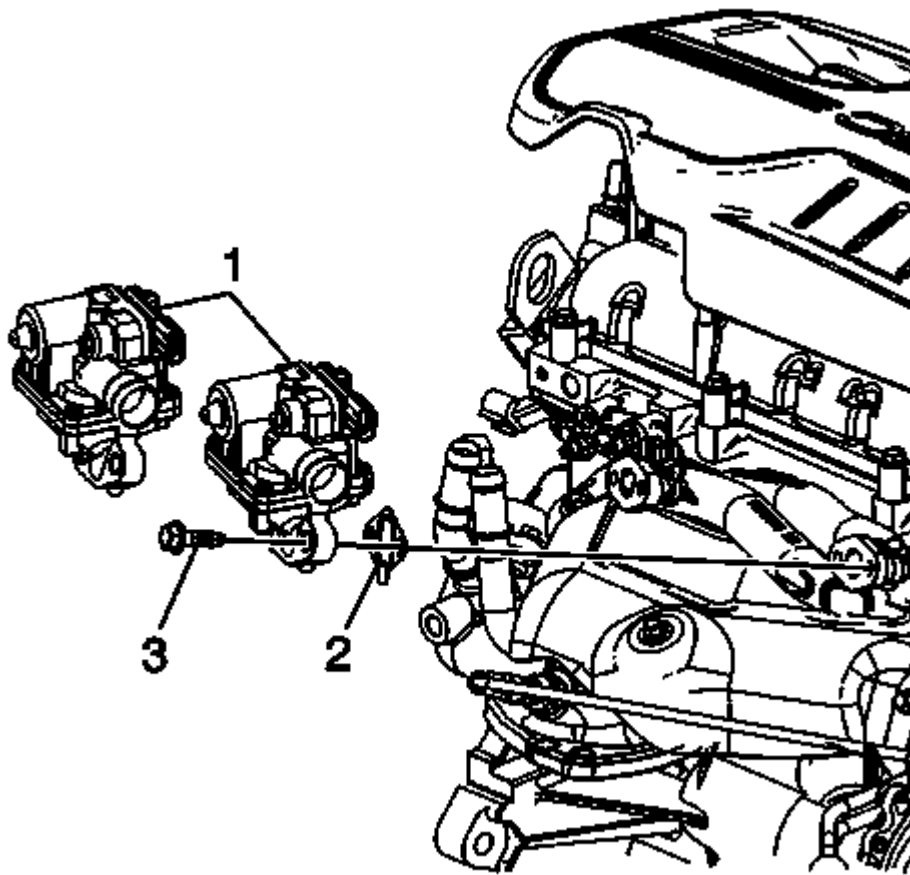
Secondary Air Injection Check Valves, Bolts And Gaskets
